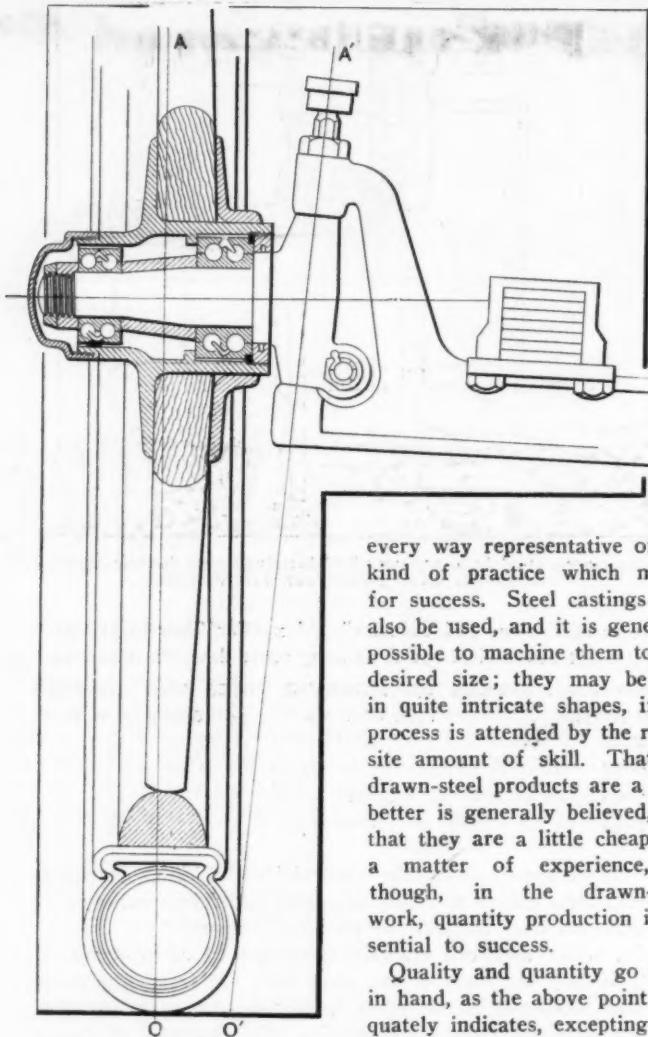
Diagrammatic front wheel assembly, with New Departure ball bearings, showing the difference O O'
